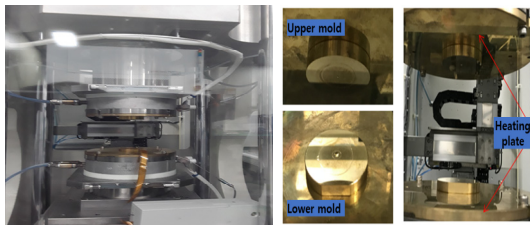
Lens molding equipment(NETZSCH DEA 288) and mold installation for 1 cavity lens molding
